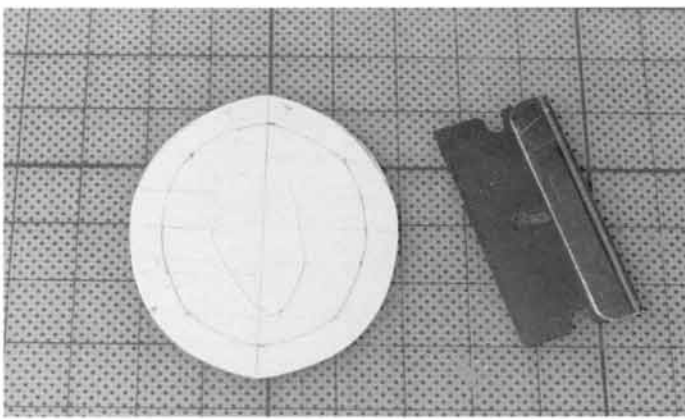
If the part is going to become an interior frame, draw a parallel interior circle to make the part into a ring. Cut the part out, again using a single-edge razor blade, and smooth the edges.
